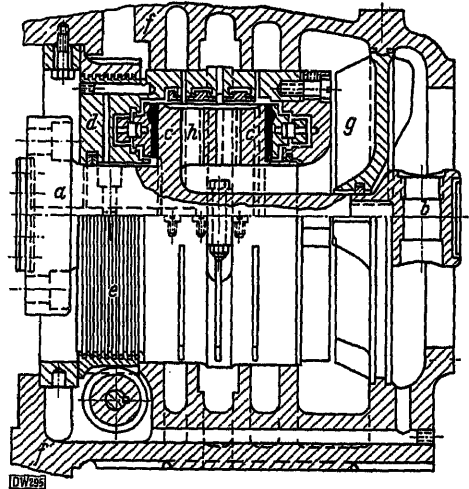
Westinghouse, impeller of the oil governor and Kingsbury thrust block of a large high-pressure turbine
